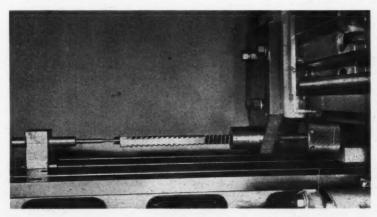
A view showing the planer adapted for broaching the extrusion die, which is supported by a back-up plate on the saddle
